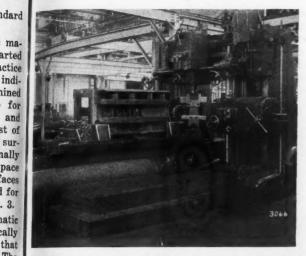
Using a Hydromatic bed miller to machine the bed as indicated in Fig. 2.
